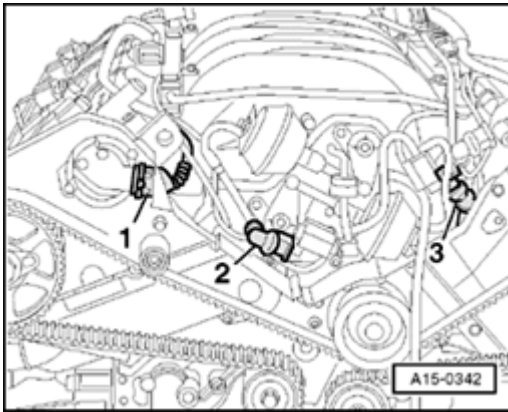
Disconnecting Connector From Camshaft Position (CMP) Sensor
